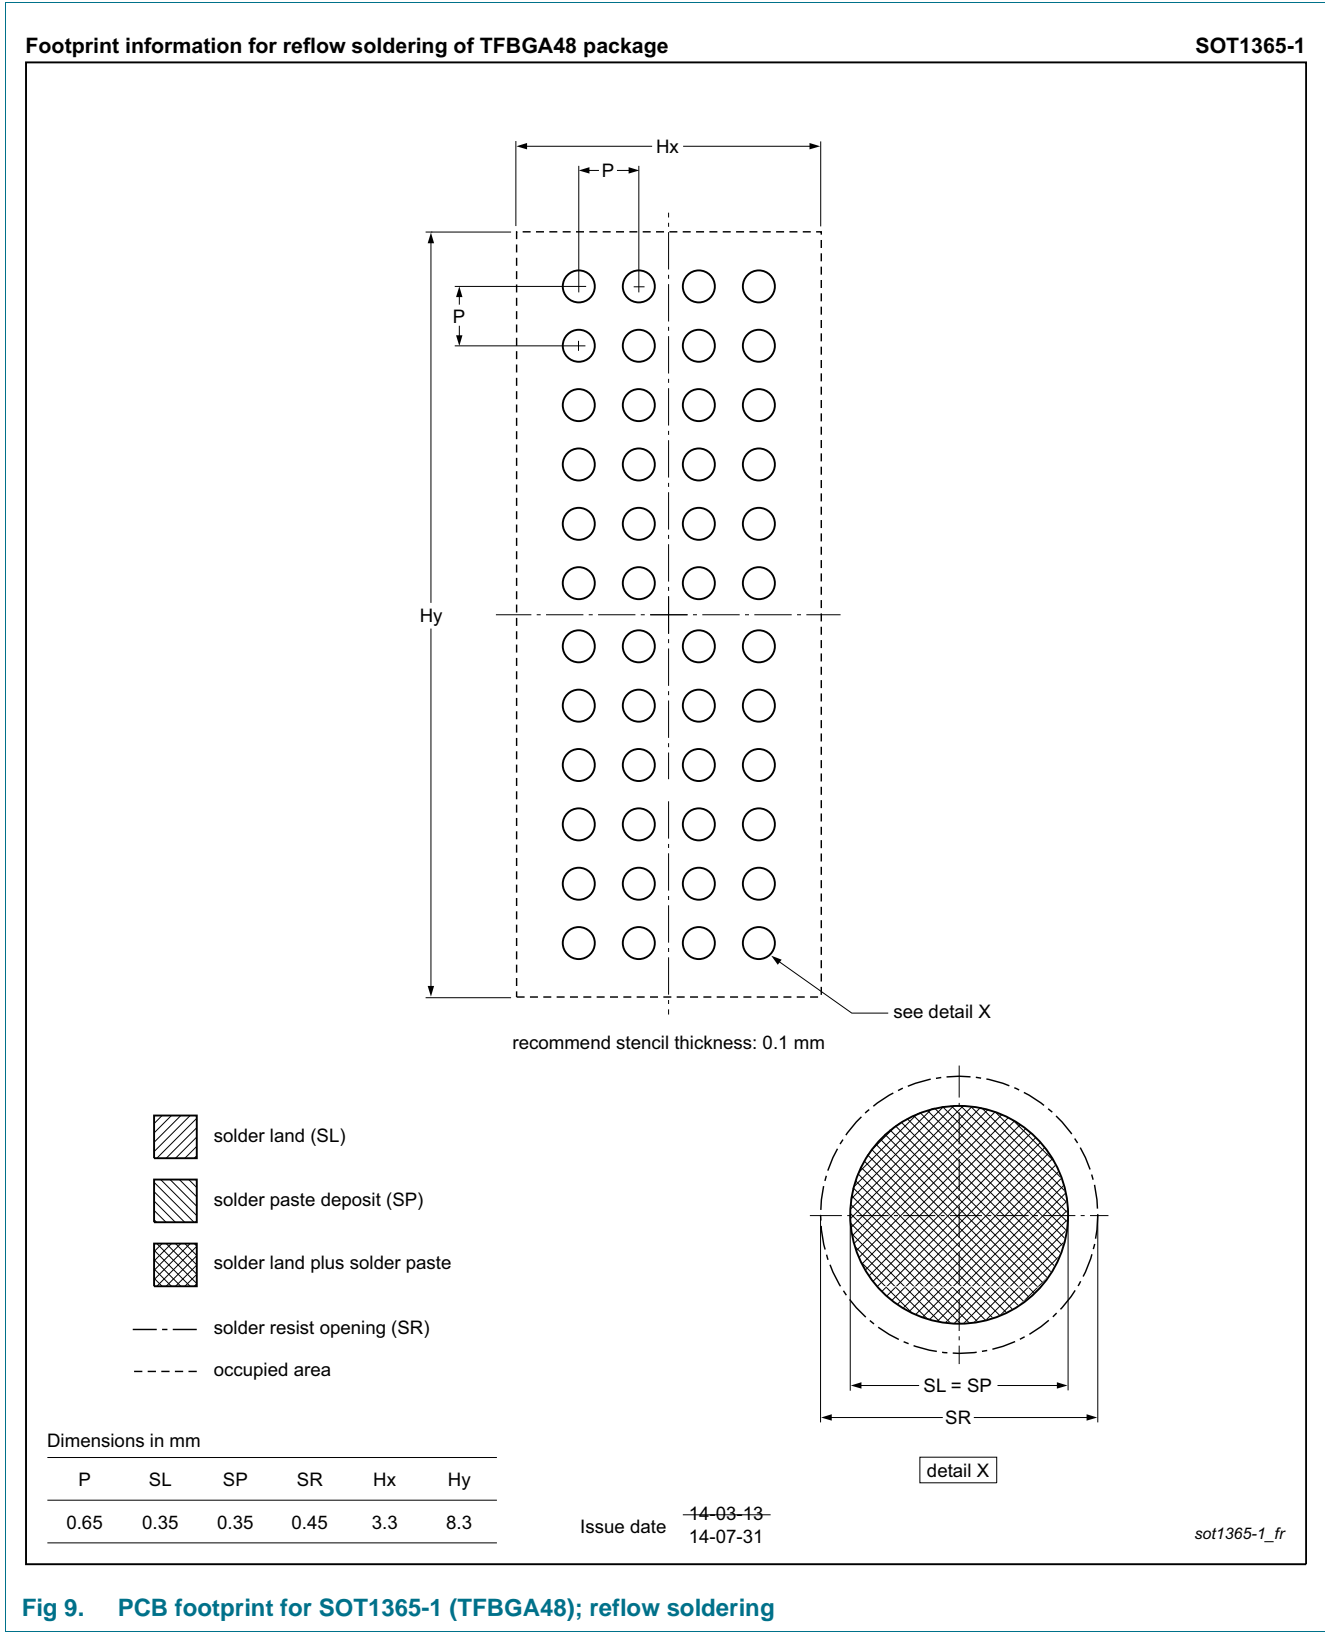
PCB footprint for SOT1365-1 (TFBGA48); reflow soldering
